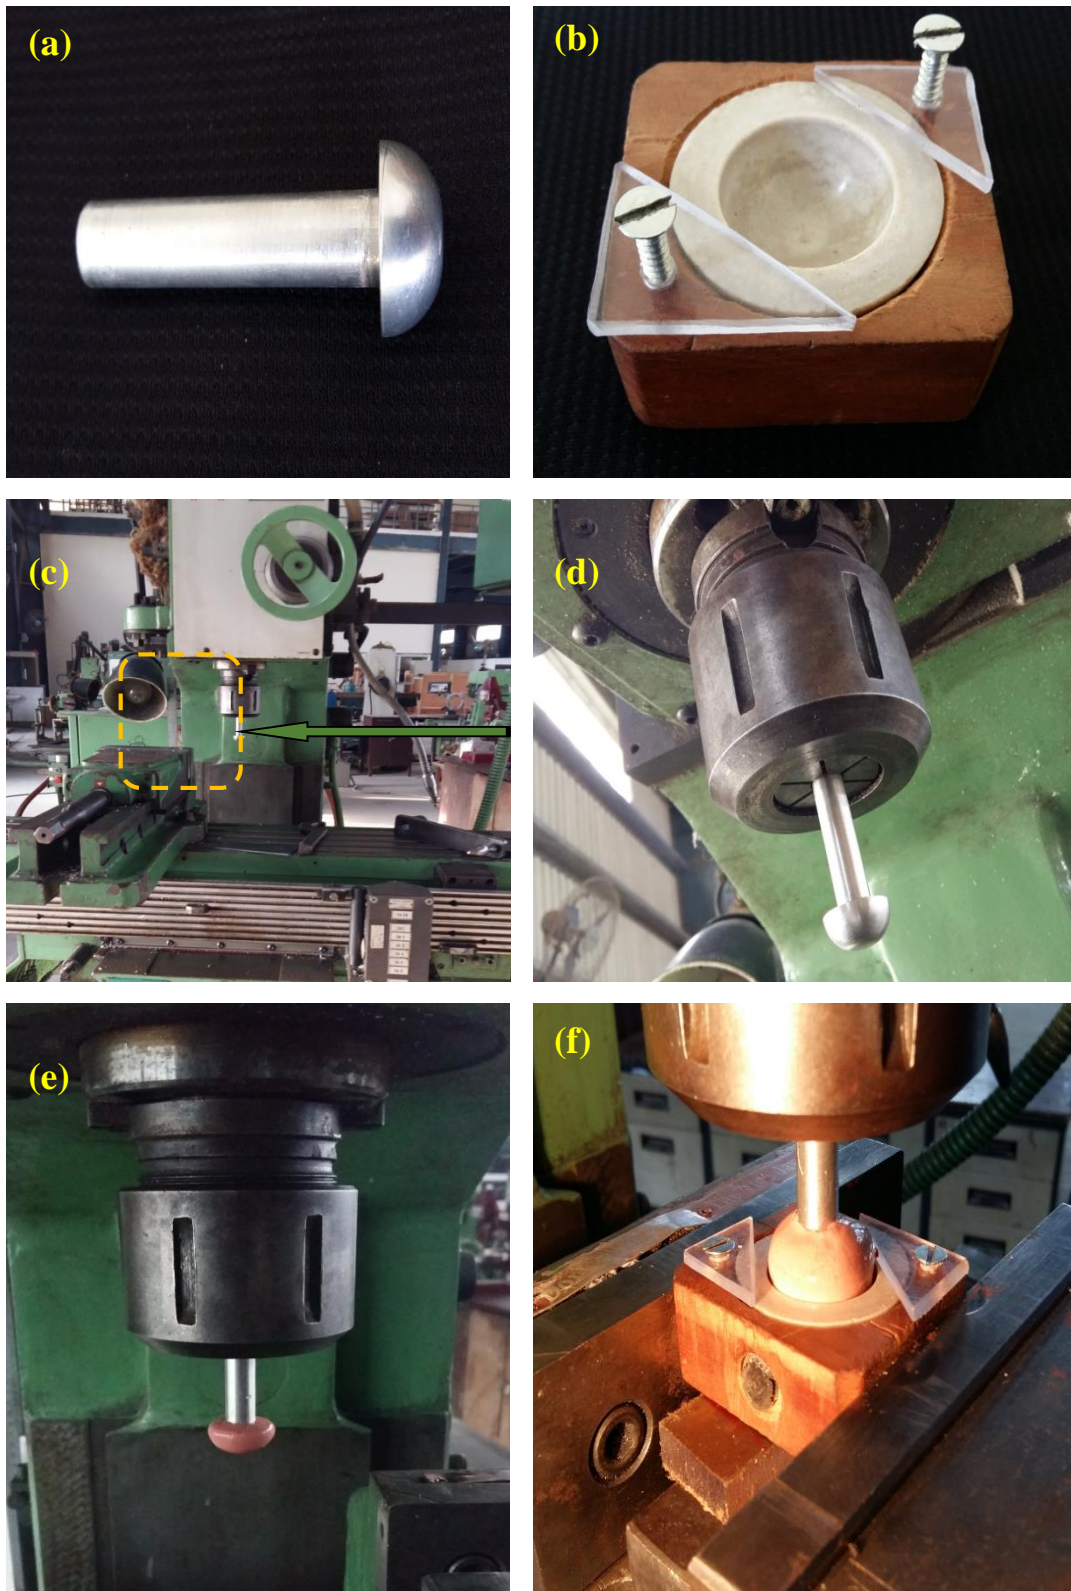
(a) Single polar articulating tool, (b) Workpiece holding fixture, (c) Overview of experimental set up, (d) Single polar tool with tool holder, (e) Single polar tool with polymer rheological abrasive finishing medium and (f) Double polar finishing tool with workpiece held by fixture.
